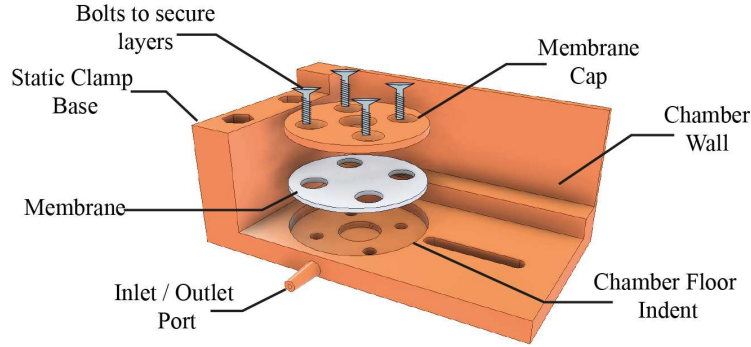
Exploded-view diagram of the stimulating balloon assembly.
